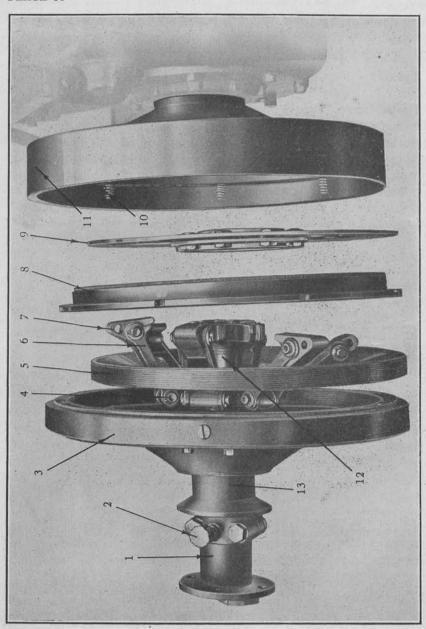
PARTLY DISASSEMBLED	Name Transmission universal joint	Grease cup to crankshaft cen-	Clutch cover. Clutch wedge strap pin. Clutch riction plate ring	Clutch wedge strap. Clutch wedge. Clutch friction plate ring (plain) Clutch friction plate. Clutch friction plate. Flywheel. Clutch toggle spider. Clutch pullout shoe.
